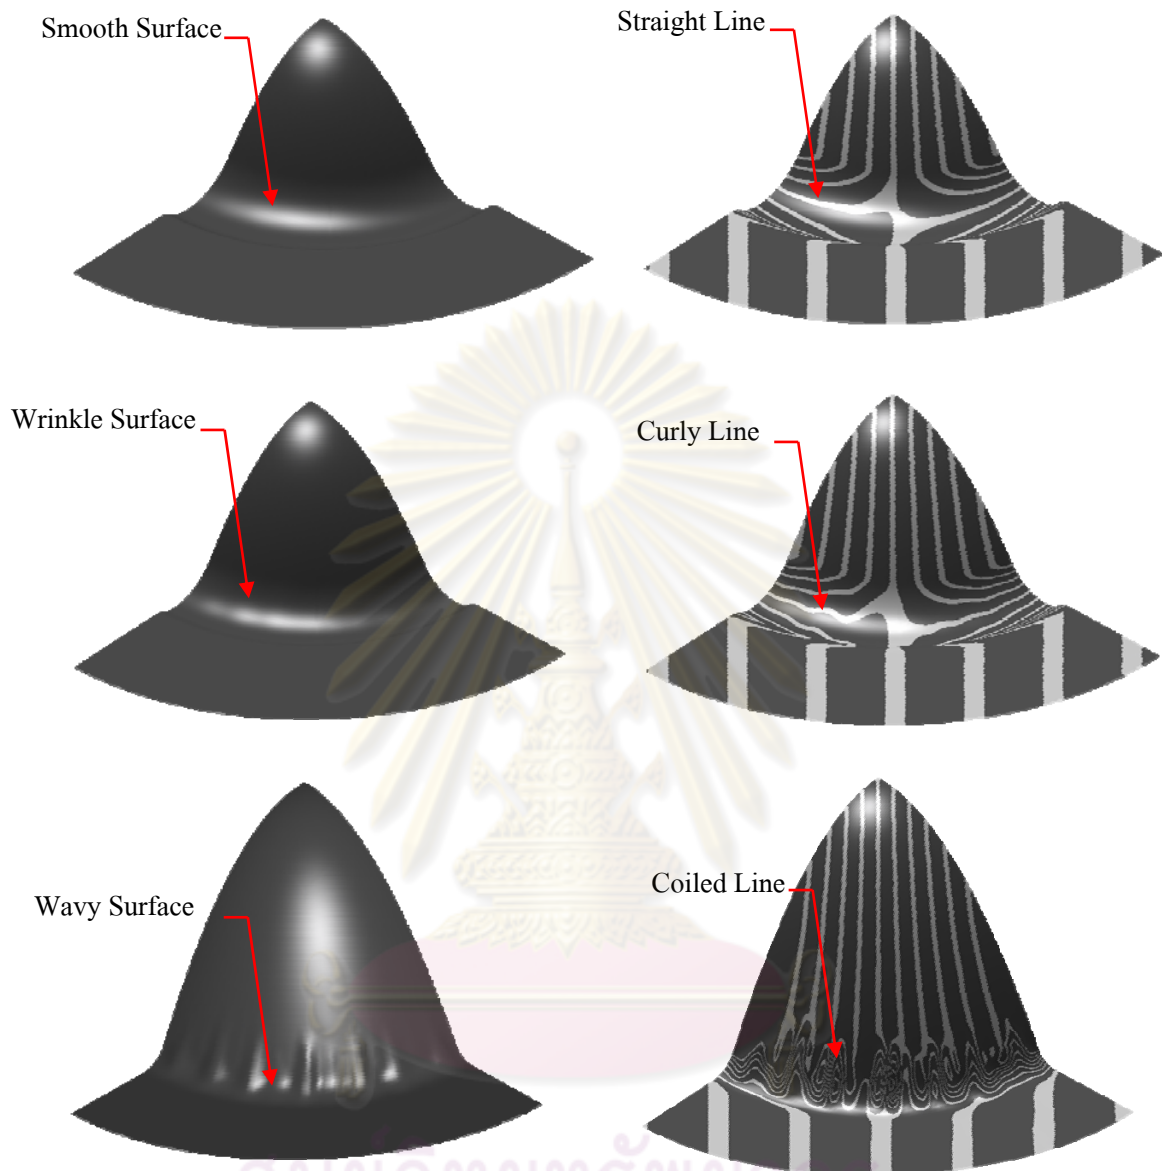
Visual inspection and zebra lines are criteria used to detect side wall wrinkle
